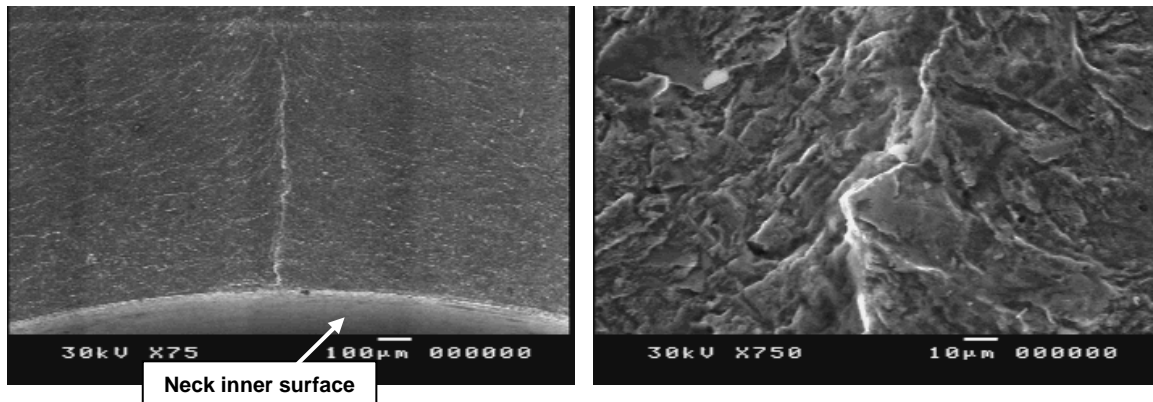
Scanning electron microscopic photographs of fracture termination zone (neck inner surface), showing brittle fracture.
